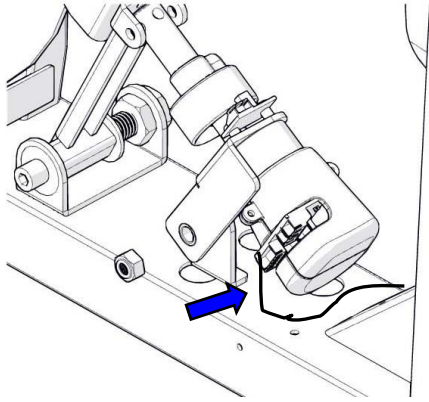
Check resistance motor plastic limit ring distance position at 32-35mm
